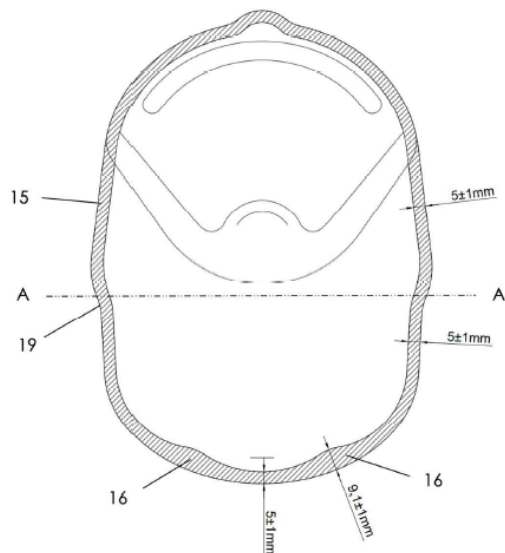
Pelican ModaVi® Peripheral Weld
